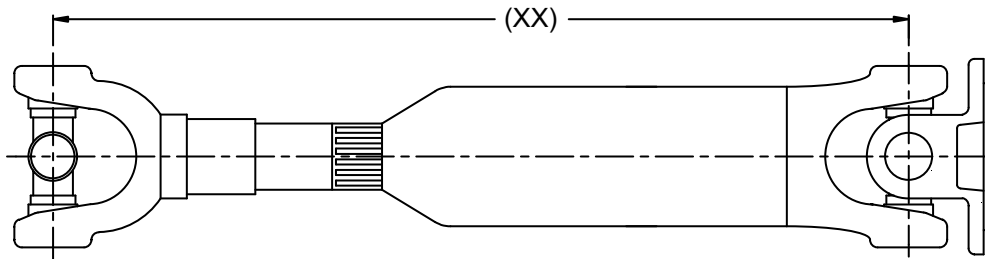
Measure the install length of the PTO drive shaft to determine which new part you need.
